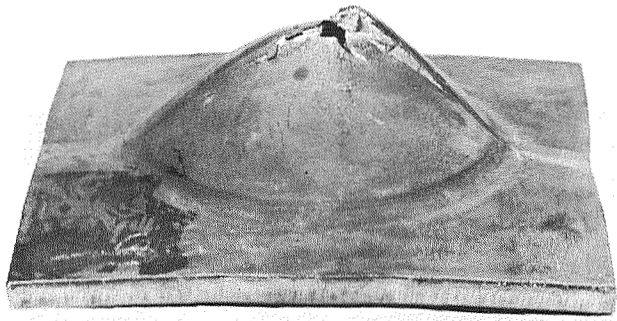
Typical Explosion Bulge Test Results of Welded HY-80 at 0°F.
